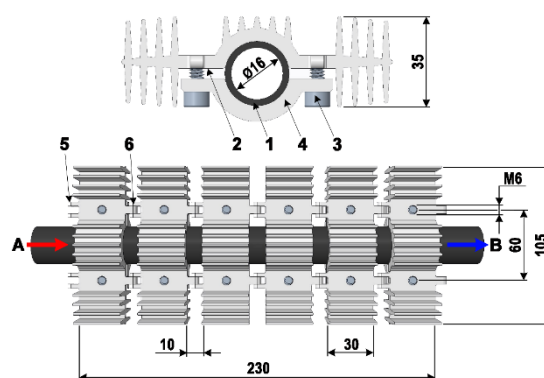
The basic dimensions and design of a demountable cooler. 1 – hydraulic pipe, 2 – upper finned flange, 3 – allen screw, 4 – lower flange, 5 – hinge, 6 – connecting pin, A – oil inlet, B – oil outlet.
